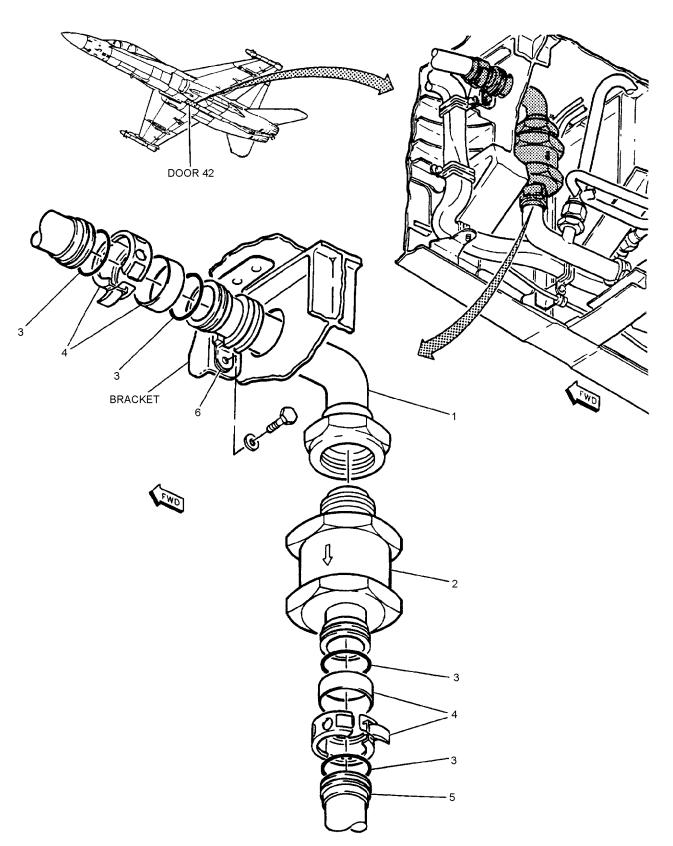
Bleed Air Check Valve (5VAT506) (Sheet 2)
